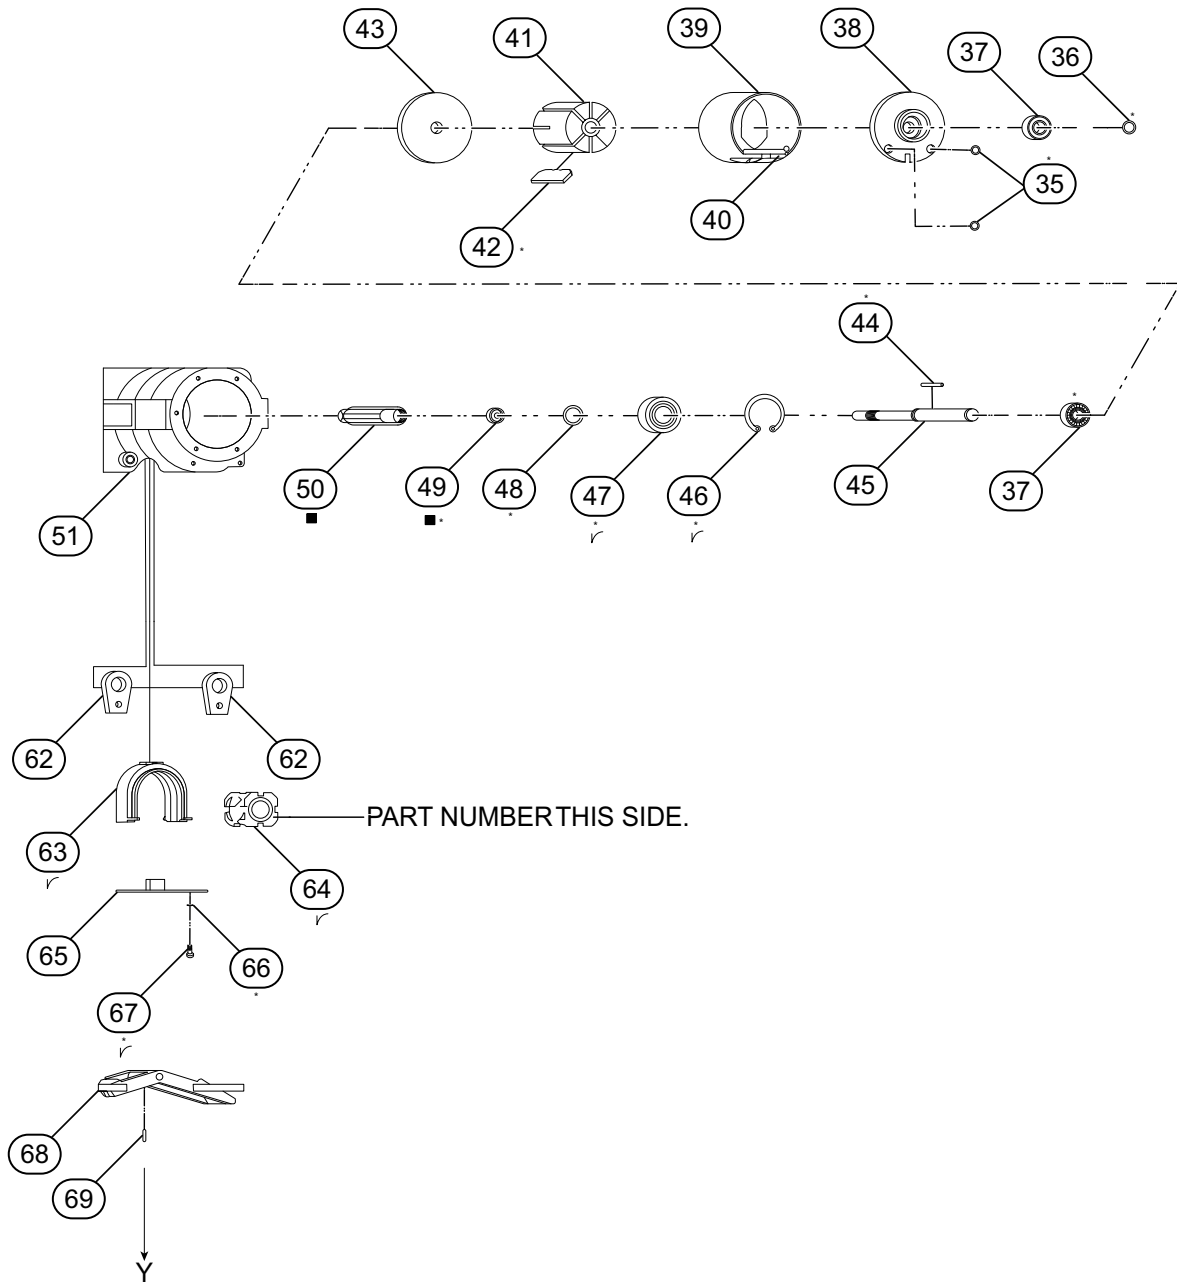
Lower Hook Assembly Drawing (MHP4732)
